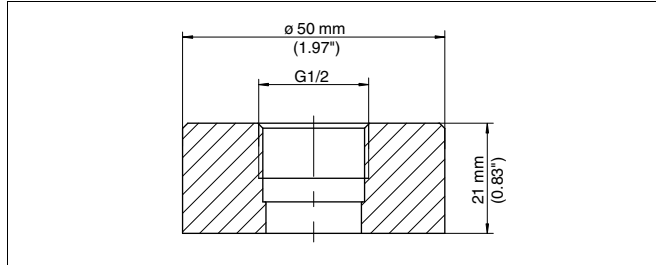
Dimensions welded socket G $\frac{1}{2}$  B acc. to ISO 228-1 - vessel
